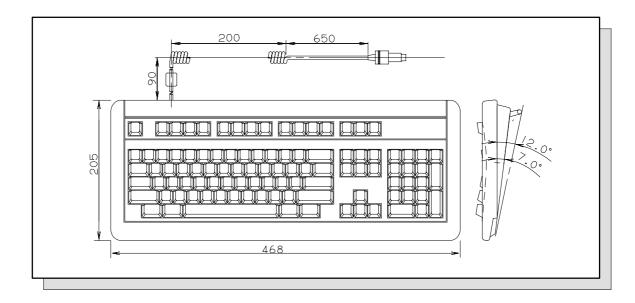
(a) EXTERNAL DIMENSIONS OF 101-TYPE FULL KEYBOARD (ENGLISH)
